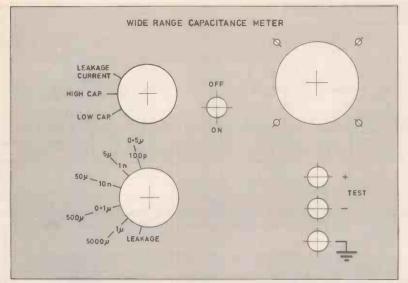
Suggested front panel (half full size) layout and lettering. The drilling sizes will depend on the components used.
